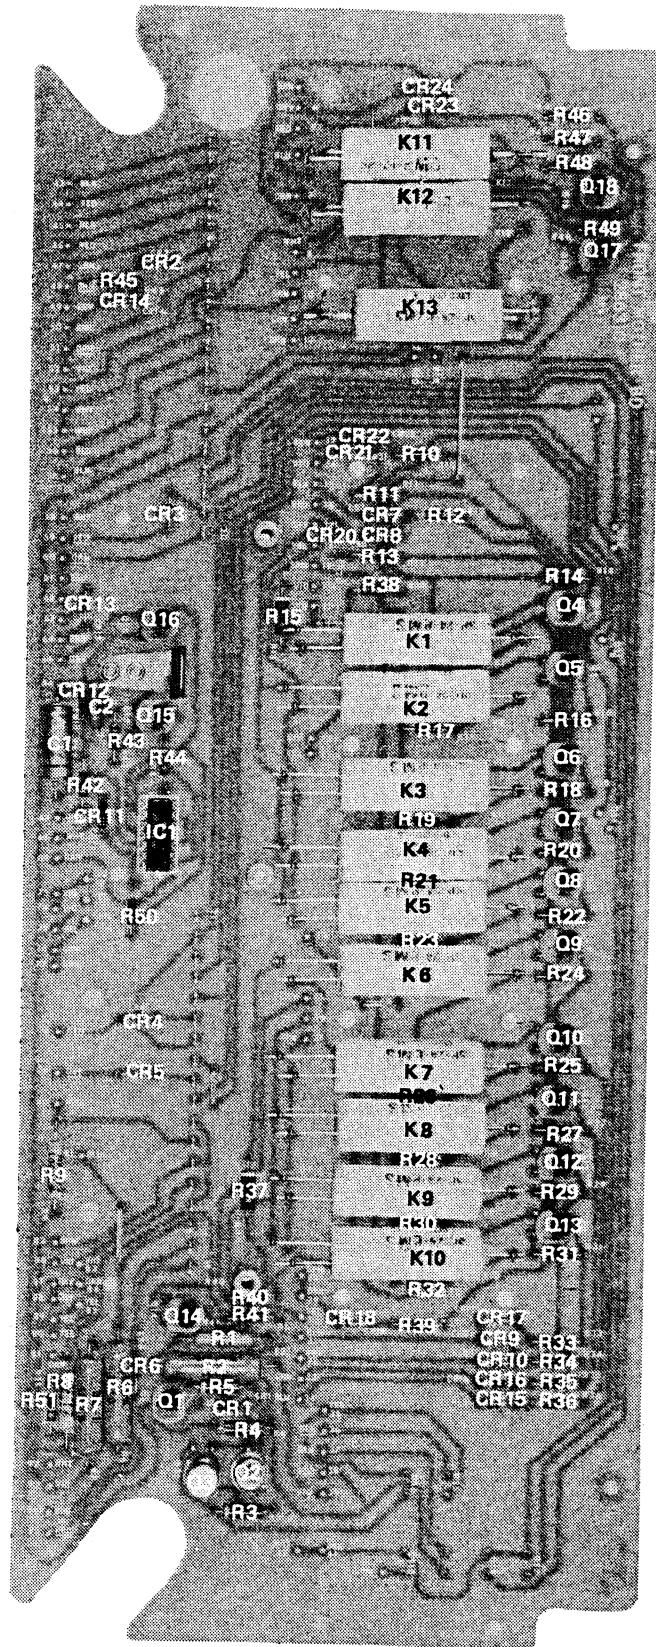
FRONT MOTHER BOARD ASSEMBLY
